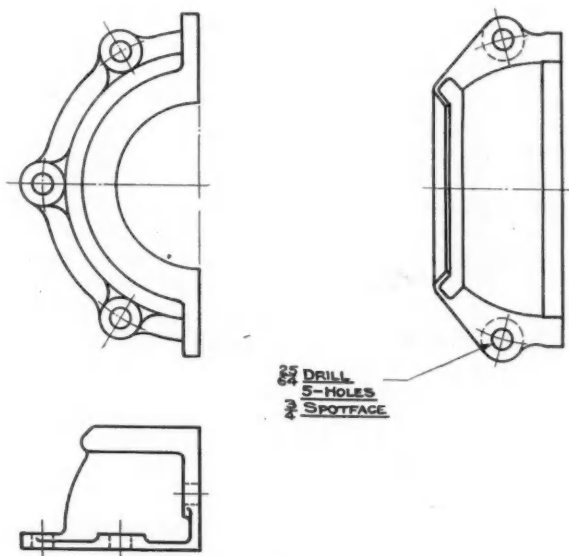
Universal joint housing has five holes spot-faced on machine shown in Fig. 3
